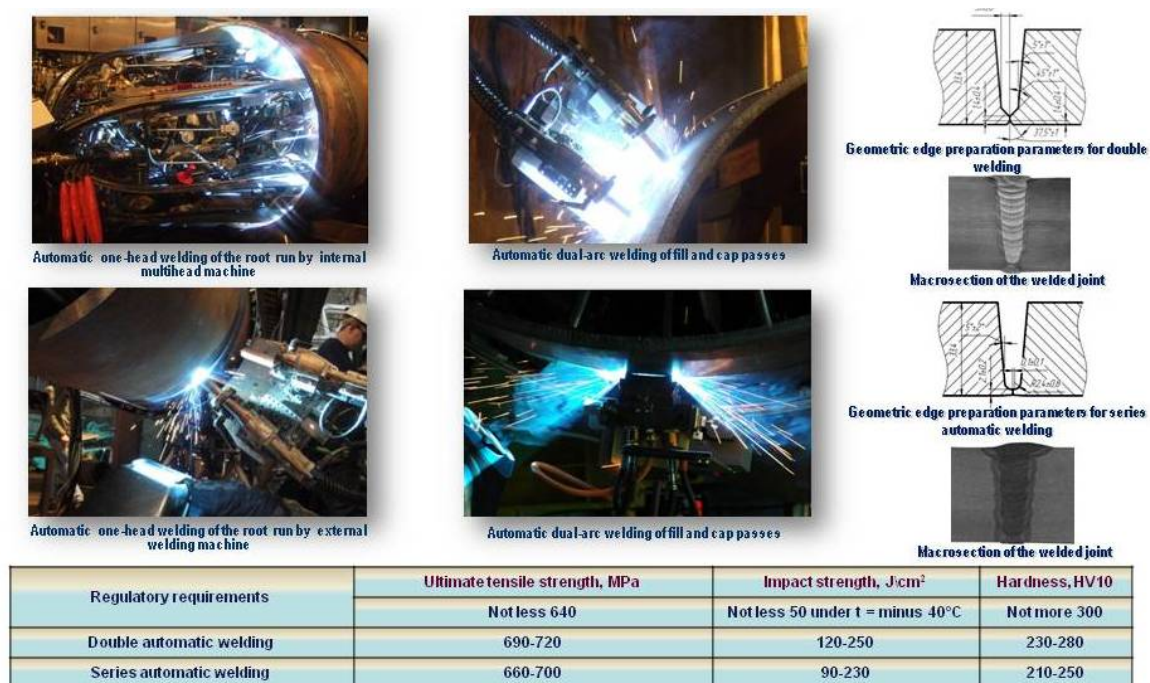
Qualification of welding technologies for ring butt-welded joints of X80 pipes
